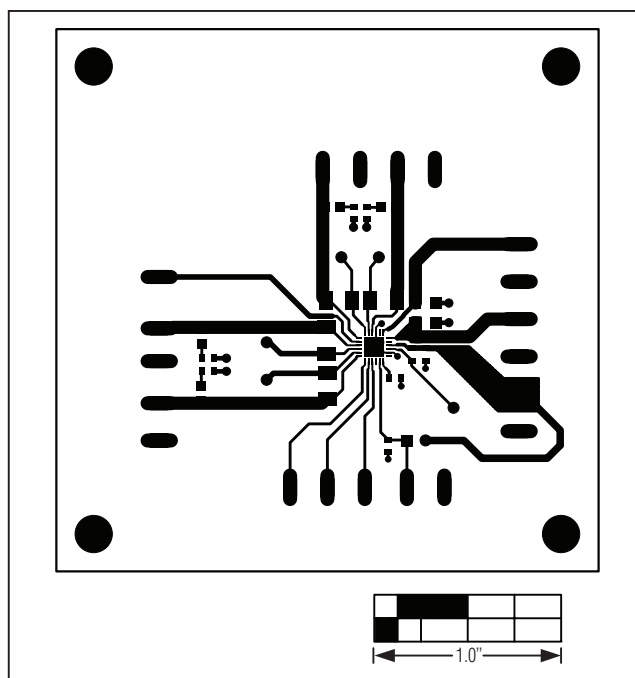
MAX17121 EV Kit PCB Layout—Component Side
